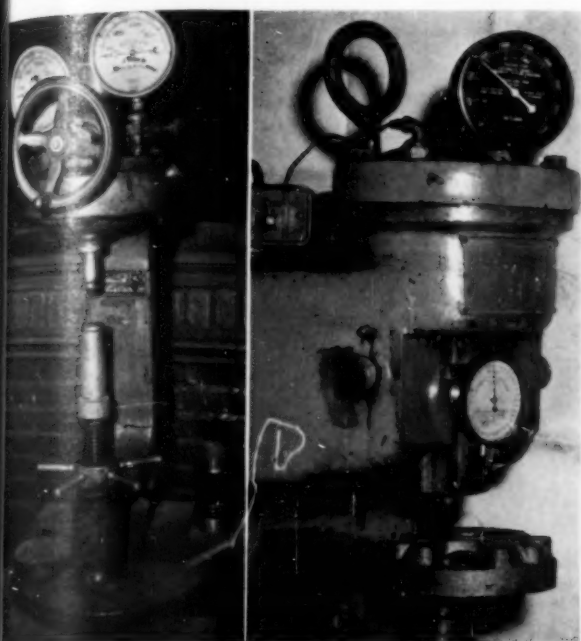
(left)—Motor driven Brinell hardness testing machine. Fig. 5 (right)—Direct reading hardness testing machine with pre-load applied to casting and indicator dial reset to zero reading.
